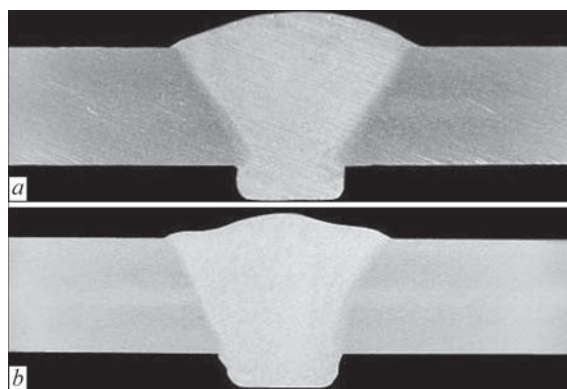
Transverse sections of welded joints of sheets of 1561 alloy ($\delta = 8.0$ mm) made by pulsed-arc MIG (a) and hybrid plasma-MIG welding (b)
